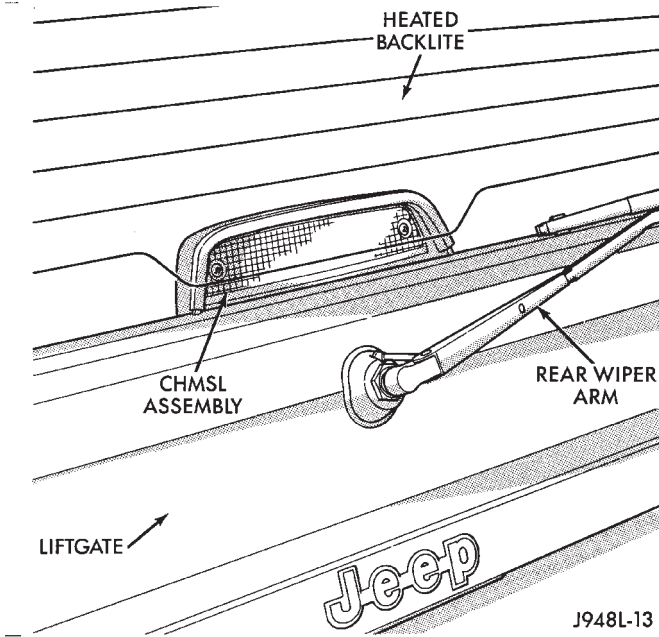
Center High Mounted Stop Lamp (CHMSL) Assembly
